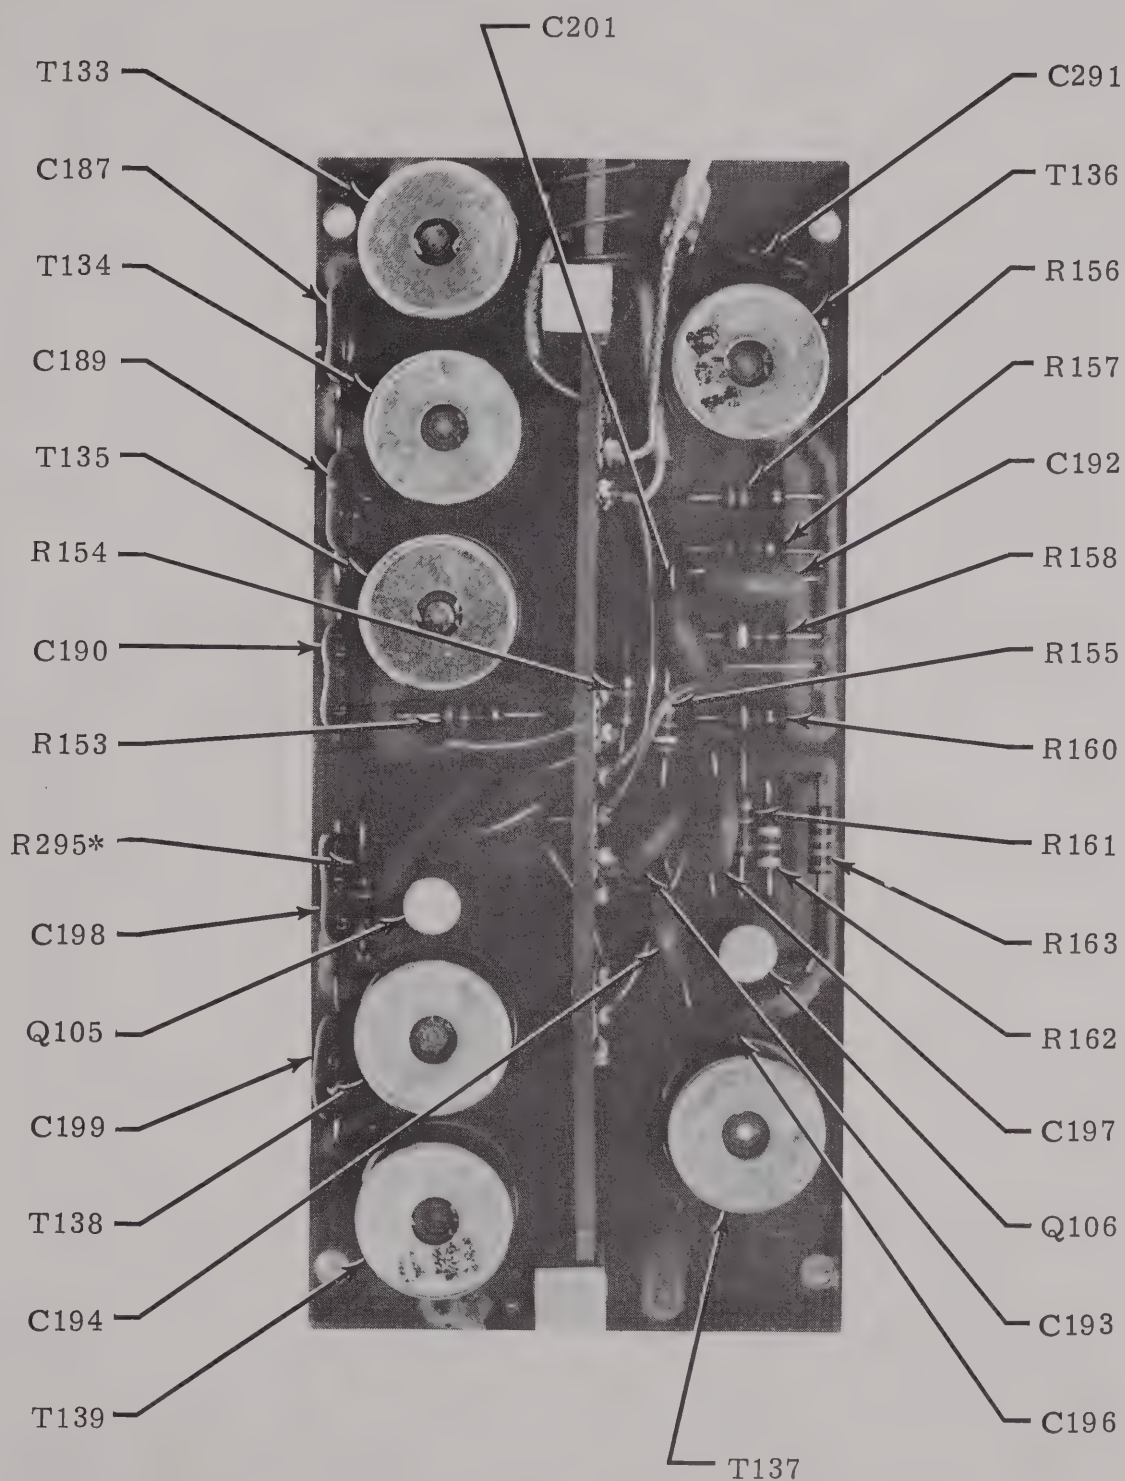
Component Location - IF Converter, Z113 (Sheet 1 of 2)
